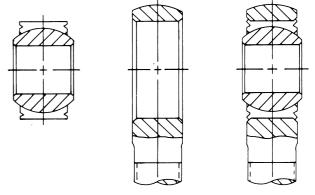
3- PIECE, V-GROOVE STAKED ROD END
